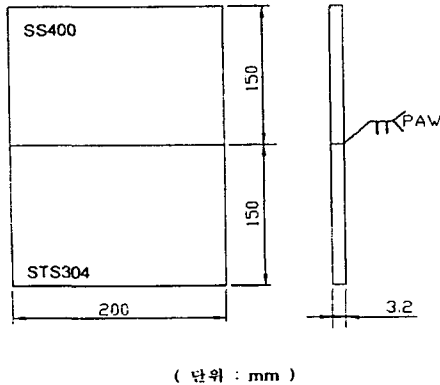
Dimension of base metal for welding (annealing)
